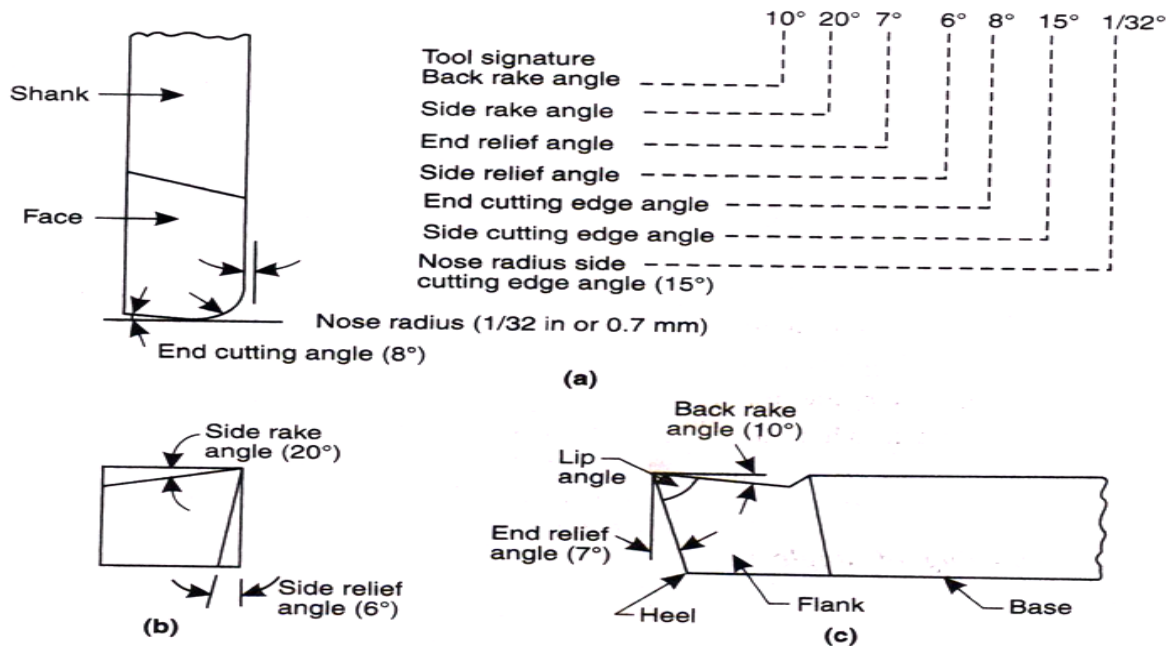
A straight-shank, right-cut, single point tool signature.
